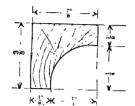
Section of End Panel Moulding of Portable Desk.
